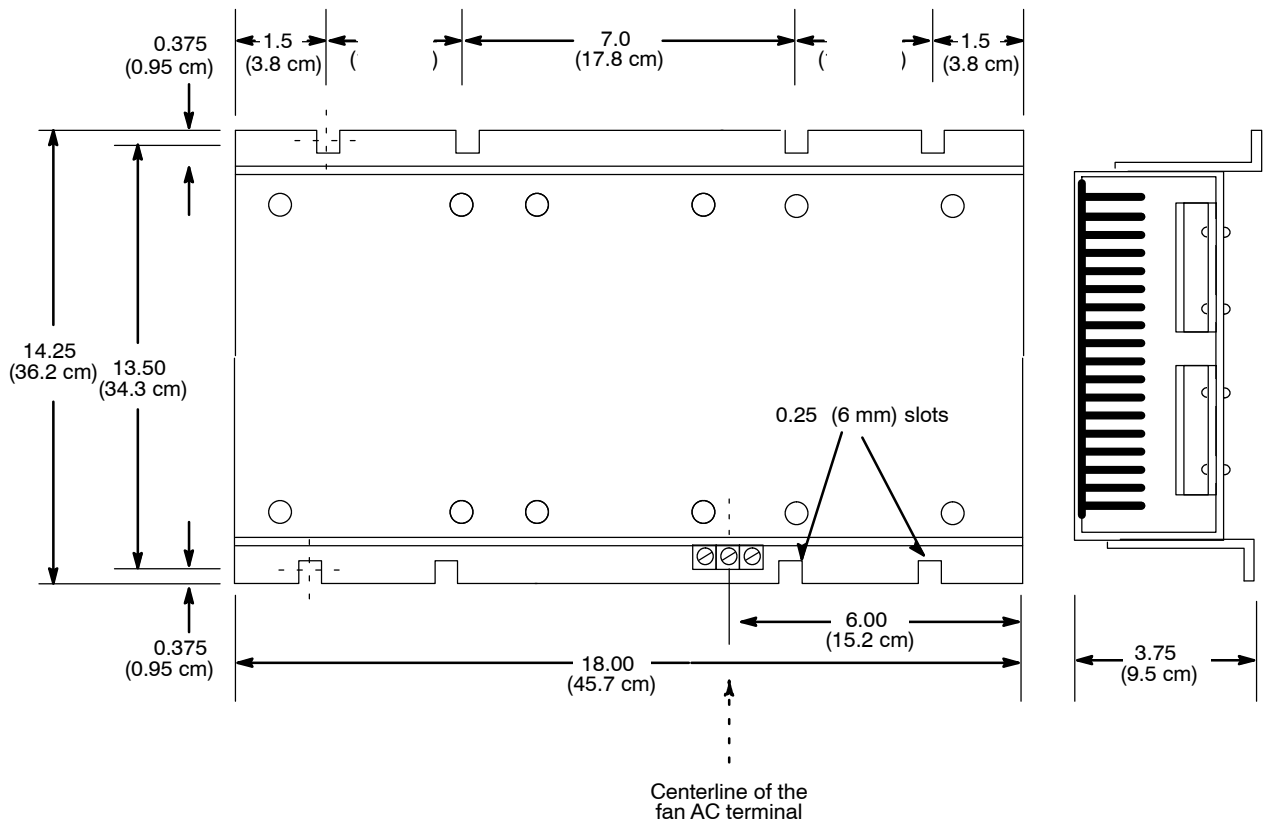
CPM Three-Position Mounting Plate Mounting Dimensions
